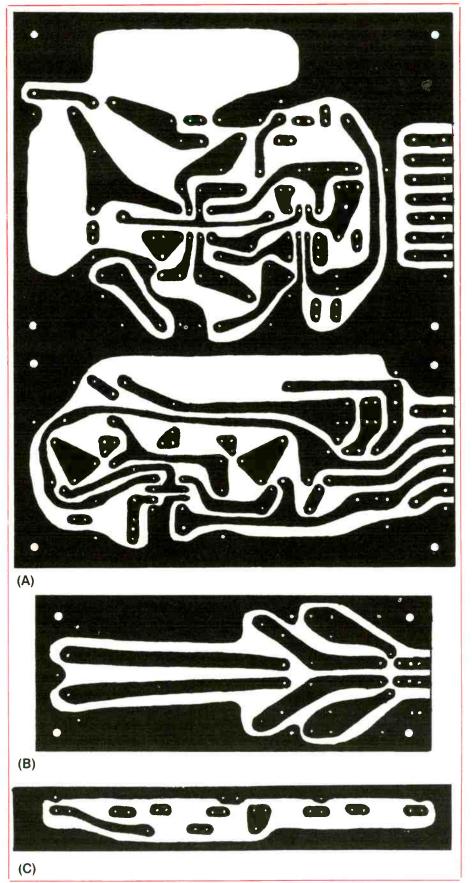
Actual-size etching-and-drilling guides for: (A) transmitter/receiver, (B) power-supply and (C) display board.
